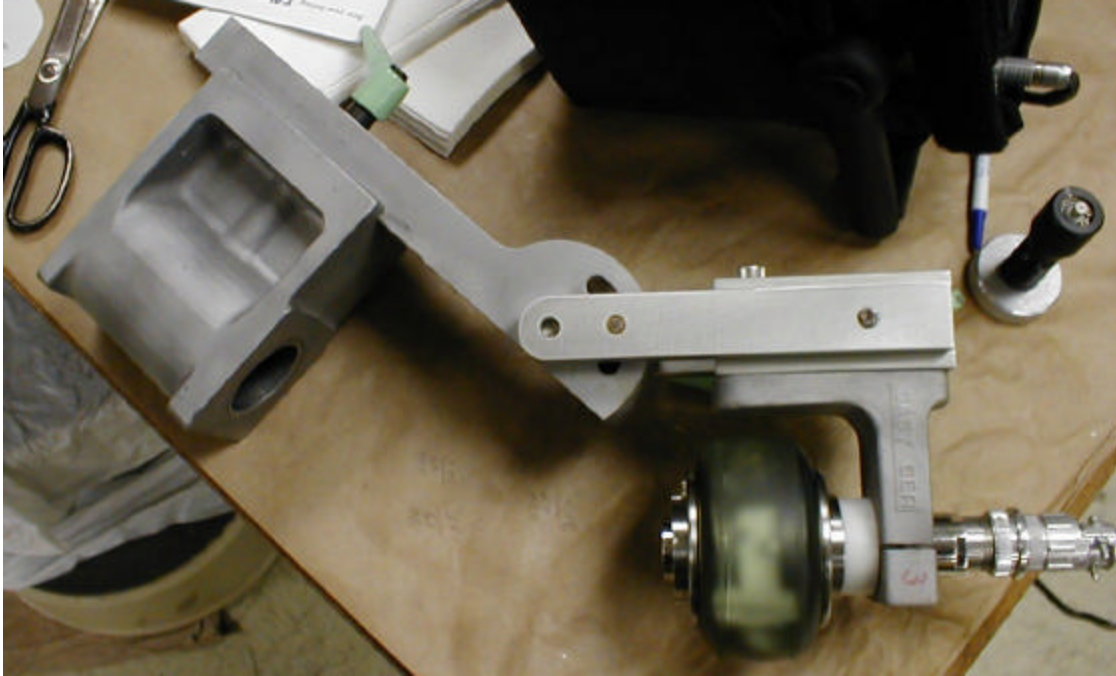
UT Inspection System, Consisting of One Pitch and One Catch Probe Inside a Fluid-Filled Wheel
